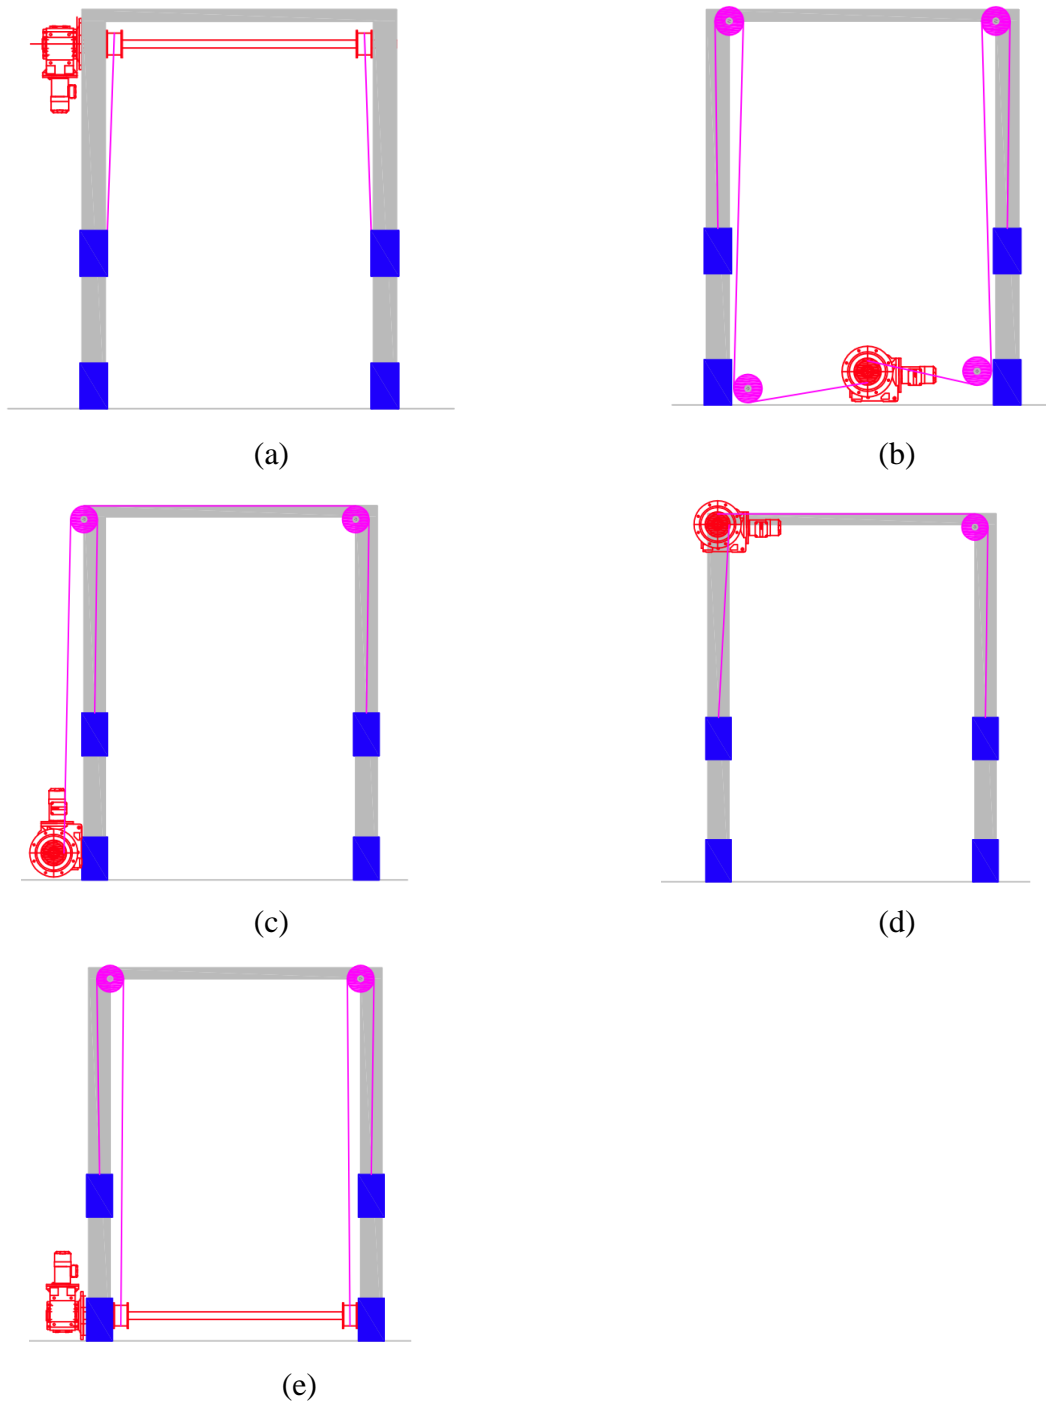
Potential arrangements for wire rope winch. (a) Winch assembly mounted at the top of one upright, two wire drums driven by a long shaft. (b) Winch assembly mounted between the two uprights with sheaves to guide the wires. (c) Winch assembly mounted at the base, connected to the lifting arms with wire rope via sheaves. (d) Winch assembly mounted at top of one upright, direct connection to one lifting arm, second arm connected via sheave. (e) Winch assembly at base. Driving two wire drums connected with a long drive shaft.
